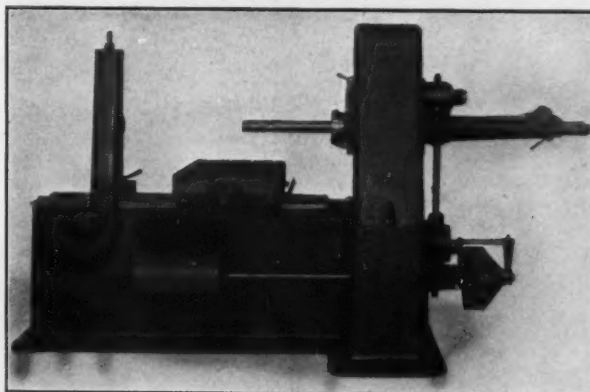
Rear View of the Combined Boring, Drilling and Milling Machine, Showing Arrangement of Motor Drive.
